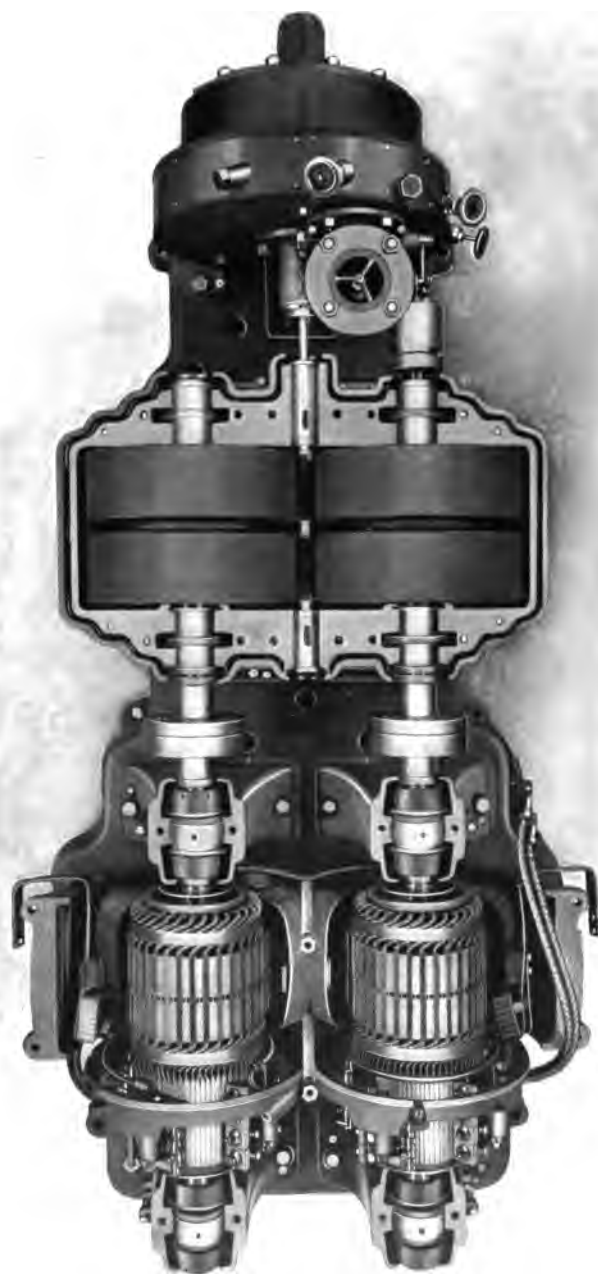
H.P. DE LAVAL STEAM TURBO-DYNAMO—UPPER HALF OF GEAR CASE AND FIELD FRAME REMOVED.
